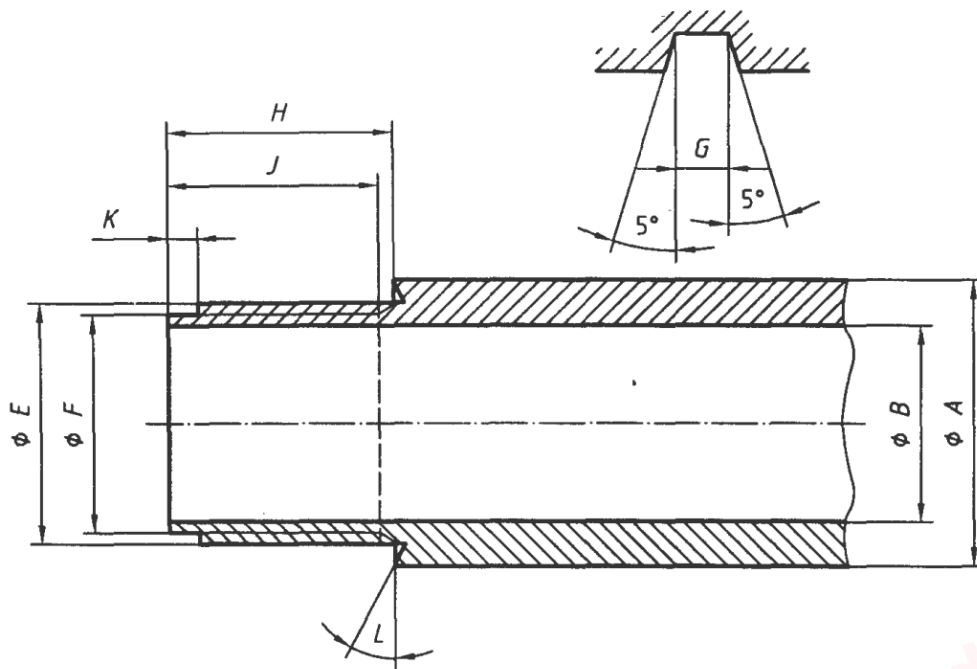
WIRELINE CORE BARREL OUTER TUBE (LOWER END)
